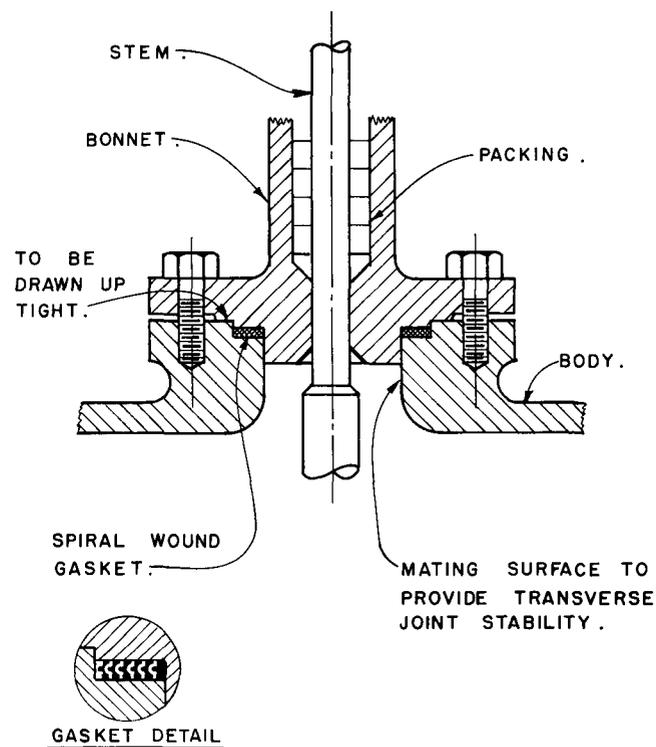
Gasketed Flanged Bonnet-to-Body Joint.
